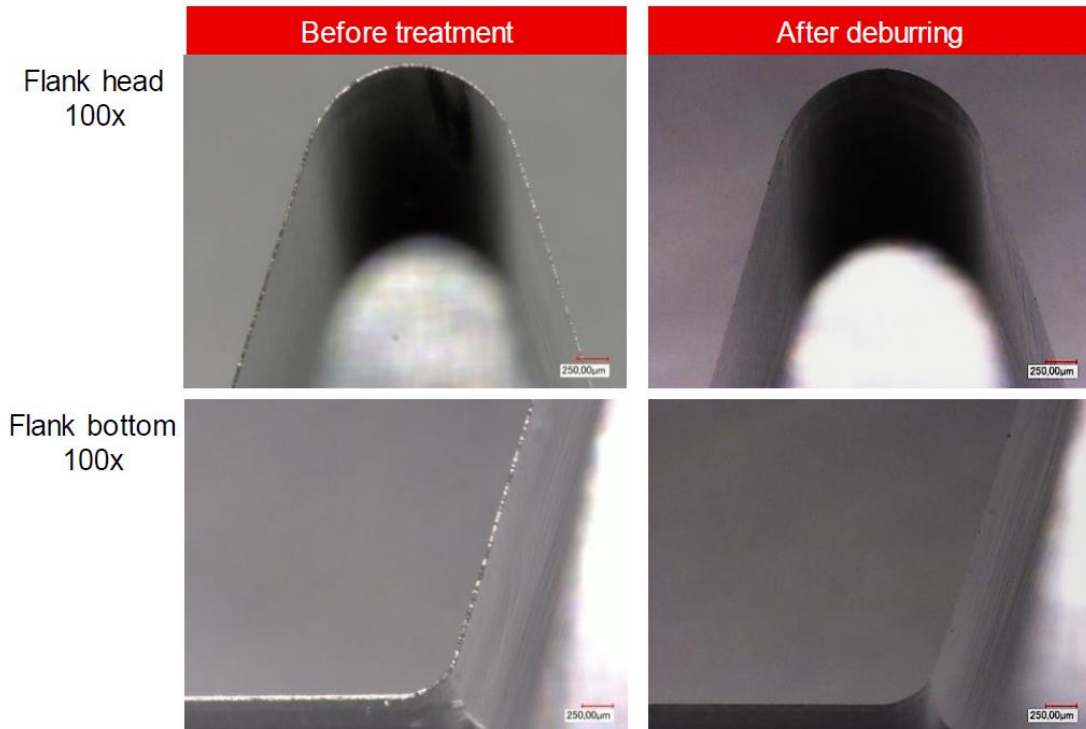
Cutting edges of a gear cutting hob before (left) and after (right) deburring treatment. [Courtesy of Oerlikon Balzers]
